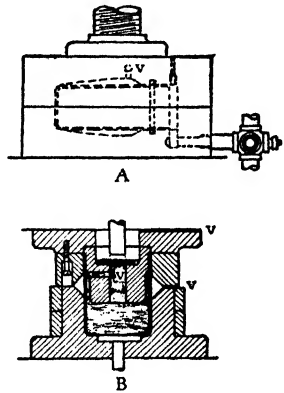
(A) A screw-closed hydraulic bulging die controlled by valves, and (B) a die closed by the outer slide of a double-action press, the pressure being applied by the inner slide.
